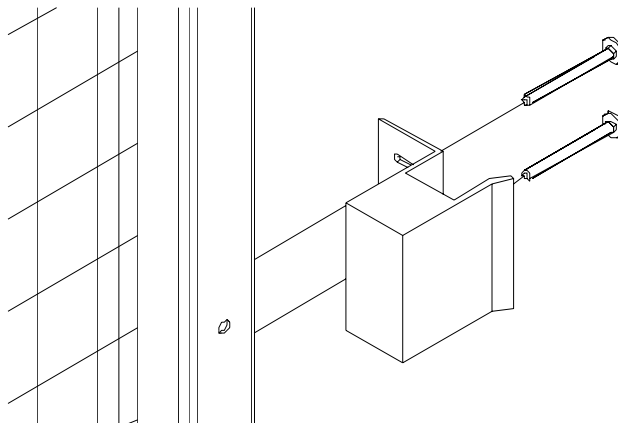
SLIDING DOOR - STOPPER ASSEMBLY
